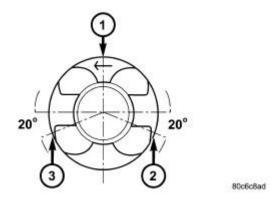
Piston Ring Gap Location Courtesy of CHRYSLER LLC
